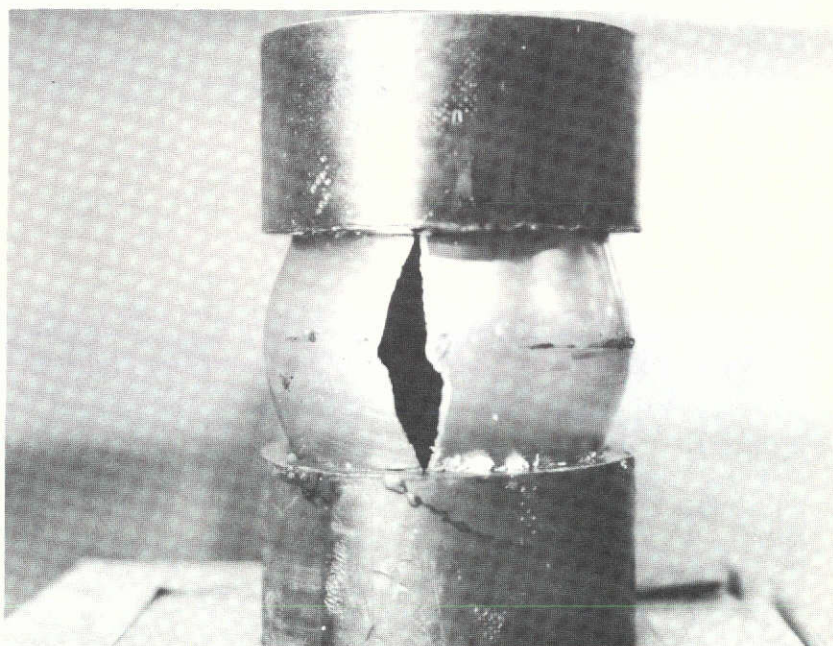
Fracture Surface of Wire Wrapped Cylinder 19
